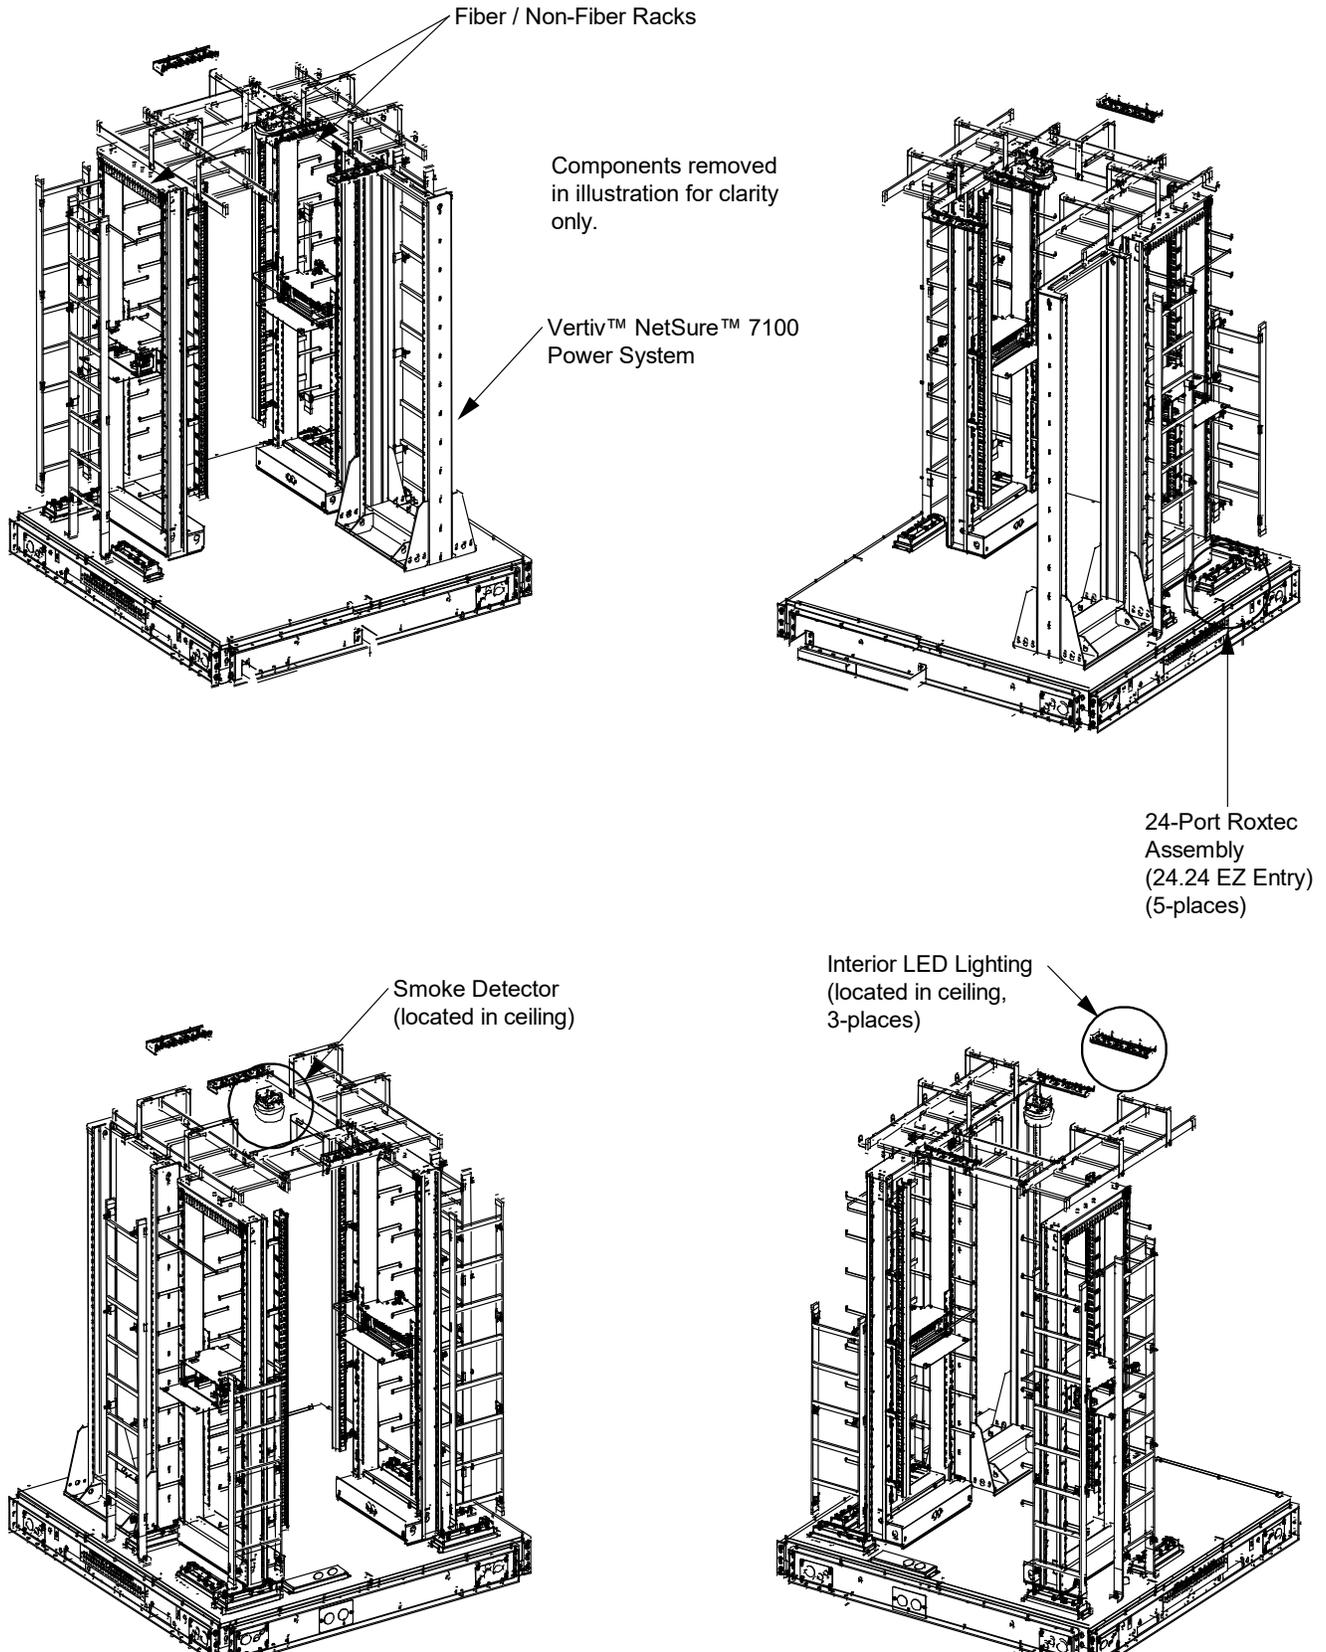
WIC Wall Detail Views (cont'd on next page)
